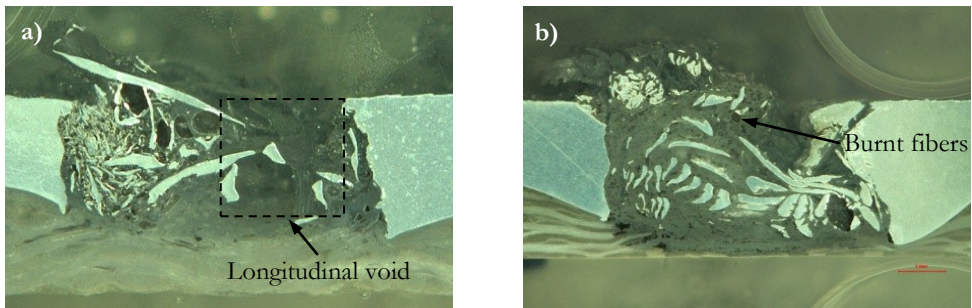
The macrographs of aluminum-thermoplastic with fibers joint cross sections. a) AA5754-PET-PET joint welded with 1000 rpm, 40 cm/min b) AA5754-PA-glass joint welded with 1800 rpm, 20 cm/min.
